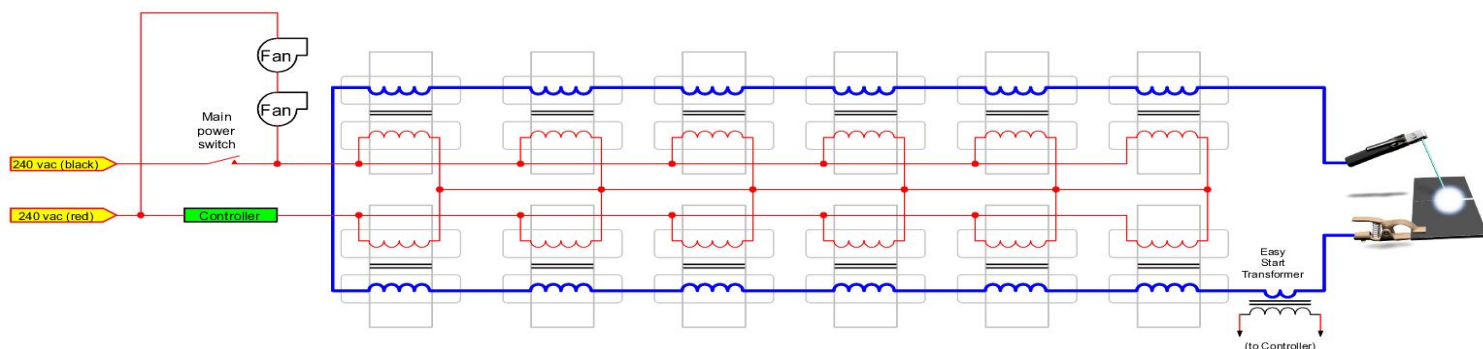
240 volt, 12 transformer welder. By now you should get the idea, so I'm not going to bother drawing the 14- or 16-transformer welder schematics. You figure it out.
